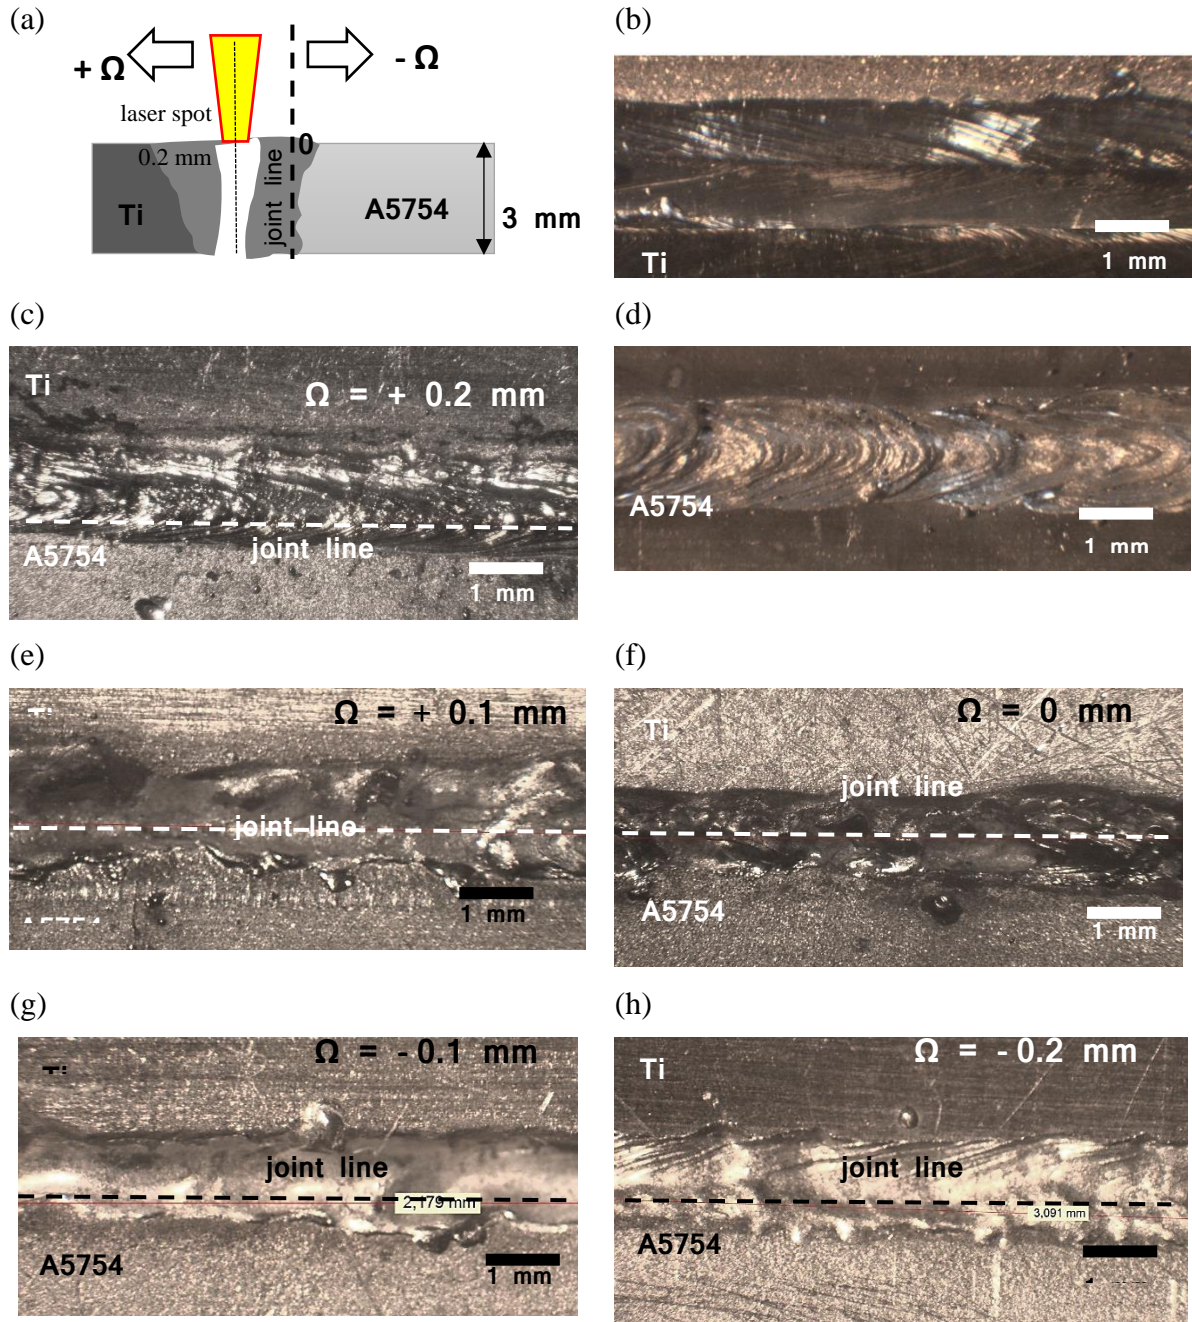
(a) Beam offset sketch and top view of the welds made with a laser power of 3 kW and welding speed of 3 m/min in (b) standalone Ti, (c)  $\Omega = + 0.2$  mm, (d) standalone A5754, (e)  $\Omega = + 0.1$  mm, (f) Ti/A5754 joint, (g)  $\Omega = - 0.1$  mm and (h)  $\Omega = - 0.2$  mm.
